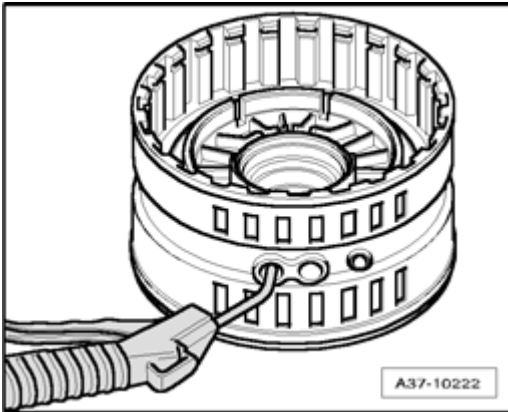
Pressing Piston "D" Out Of Cylinder "D" With Compressed Air
